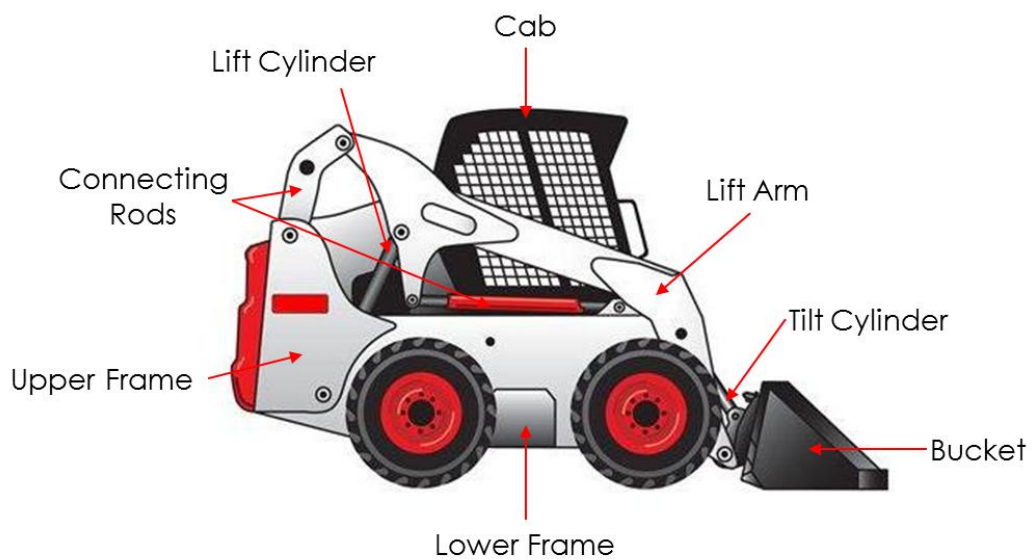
Parts of a typical skid-steer loader with Type II mechanism [3]
